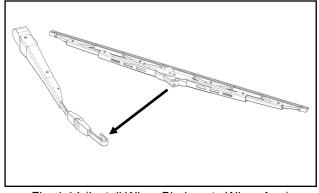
(Install Wiper Blade onto Wiper Arm)
